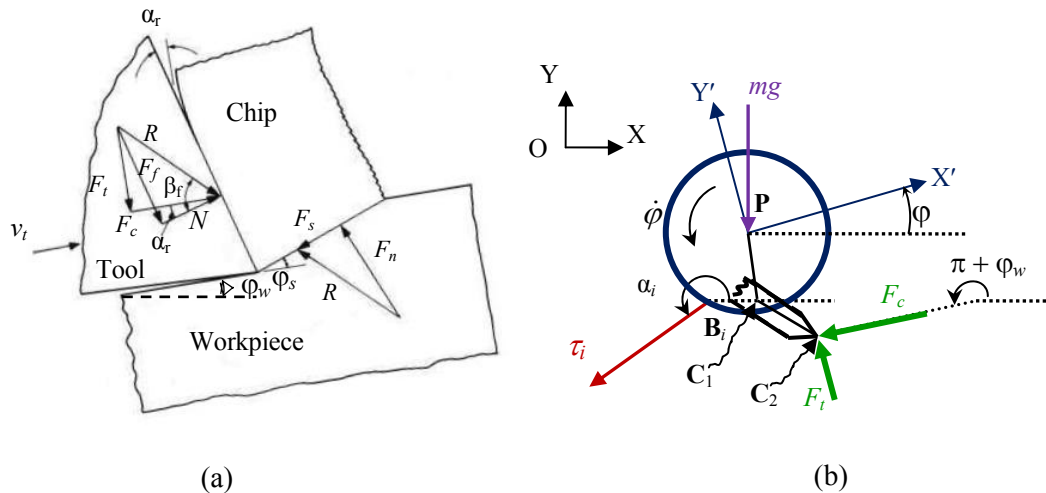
(a) Force diagram in orthogonal cutting [11], (b) free-body diagram of mobile platform during machining.
